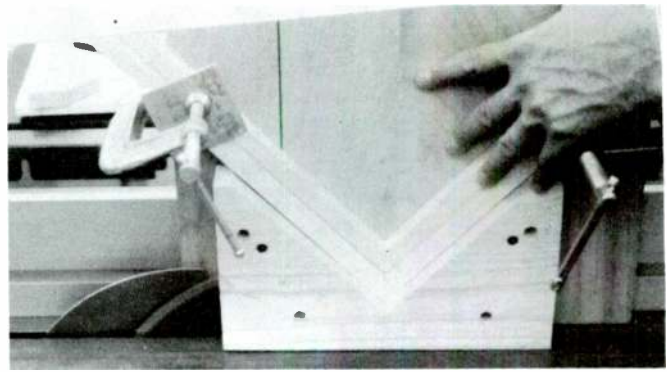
Cutting the spline slot with the grille frame clamped to the jig.
